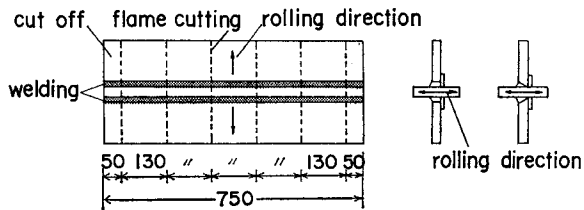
Fabrication of Specimens (Unit: mm)
